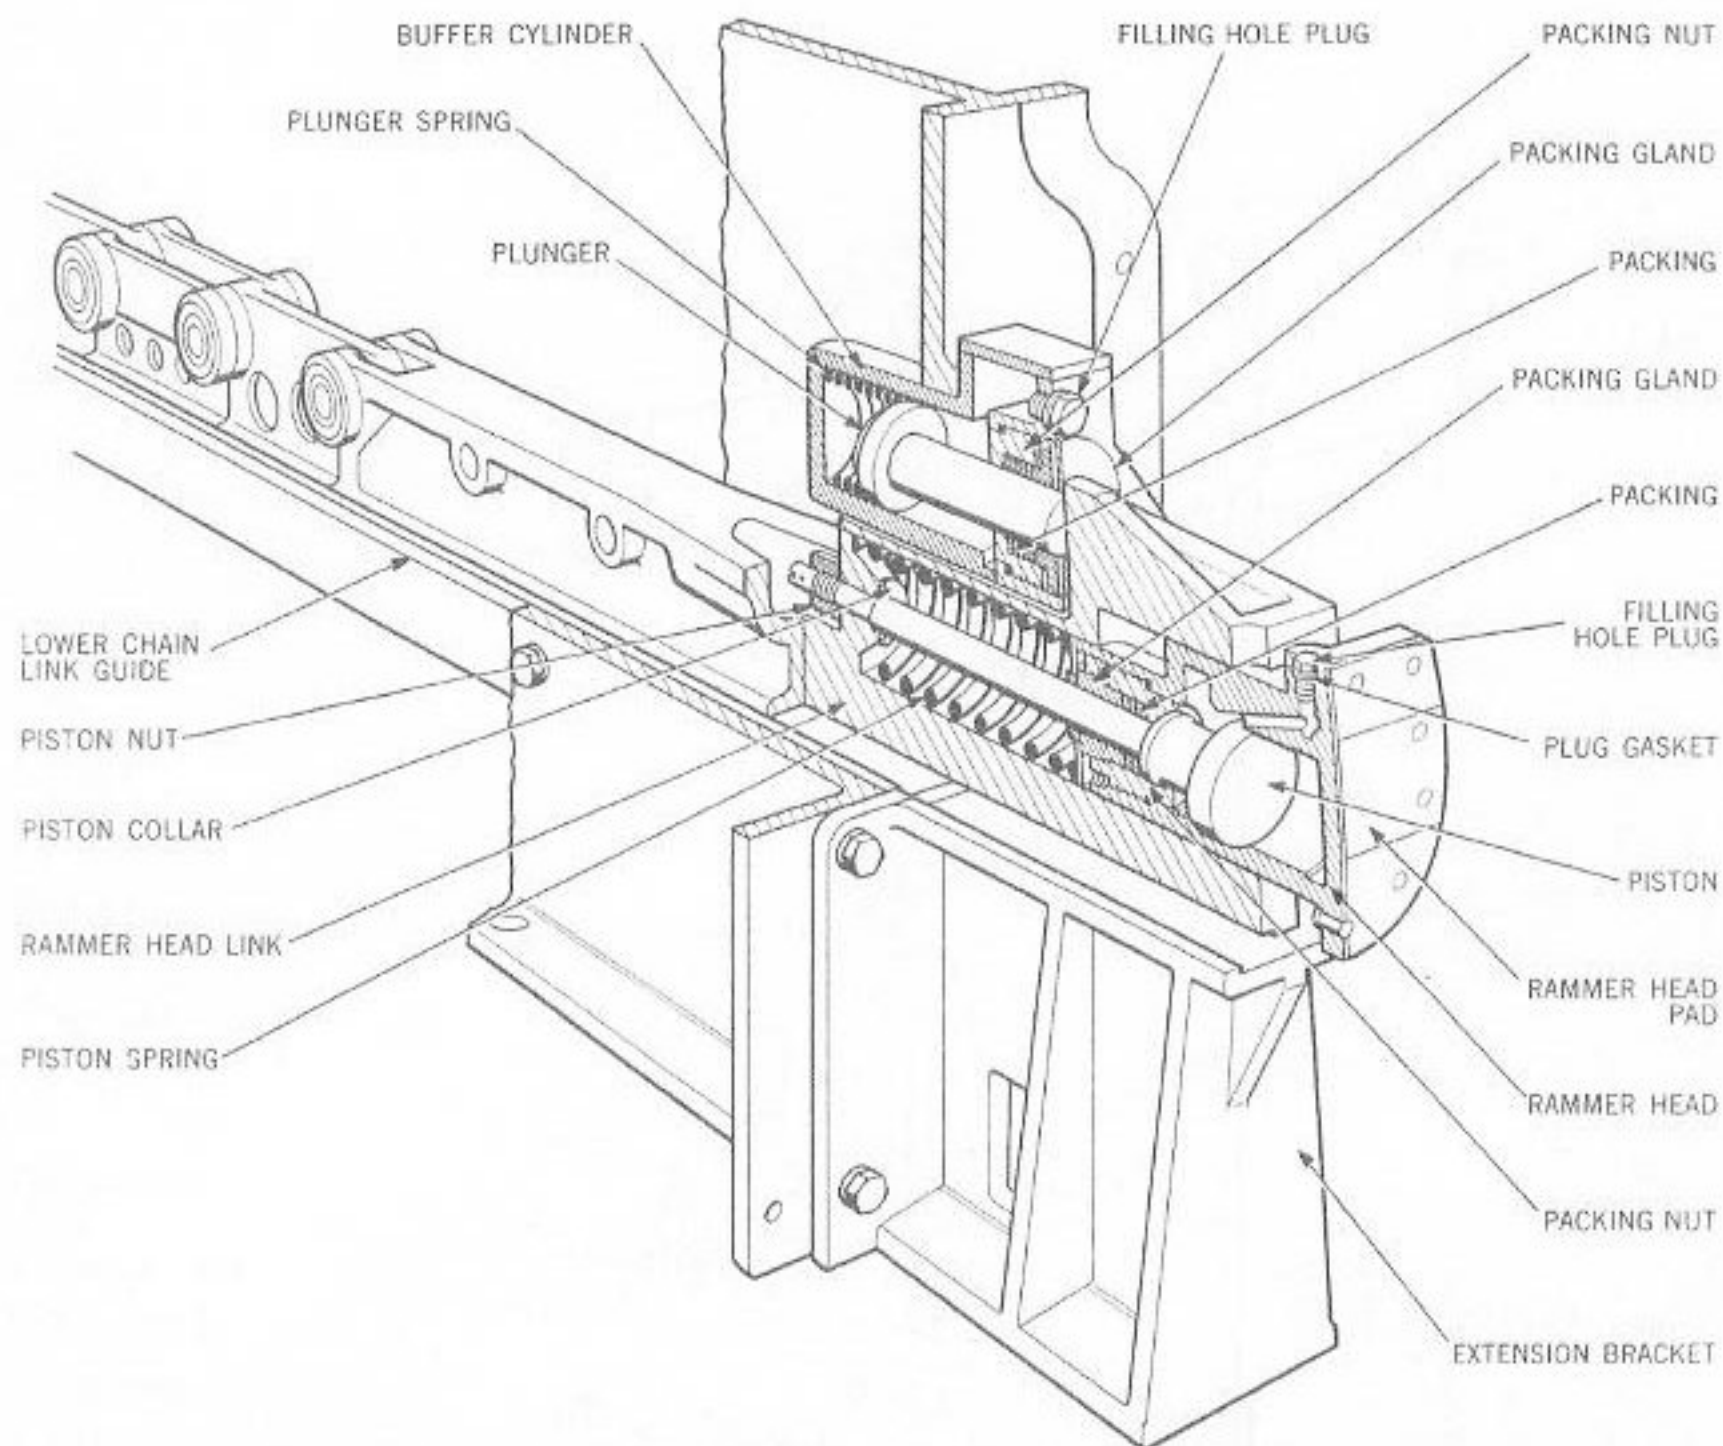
Rammer Chain, Head Link, and Withdraw Buffer, Sectional View
